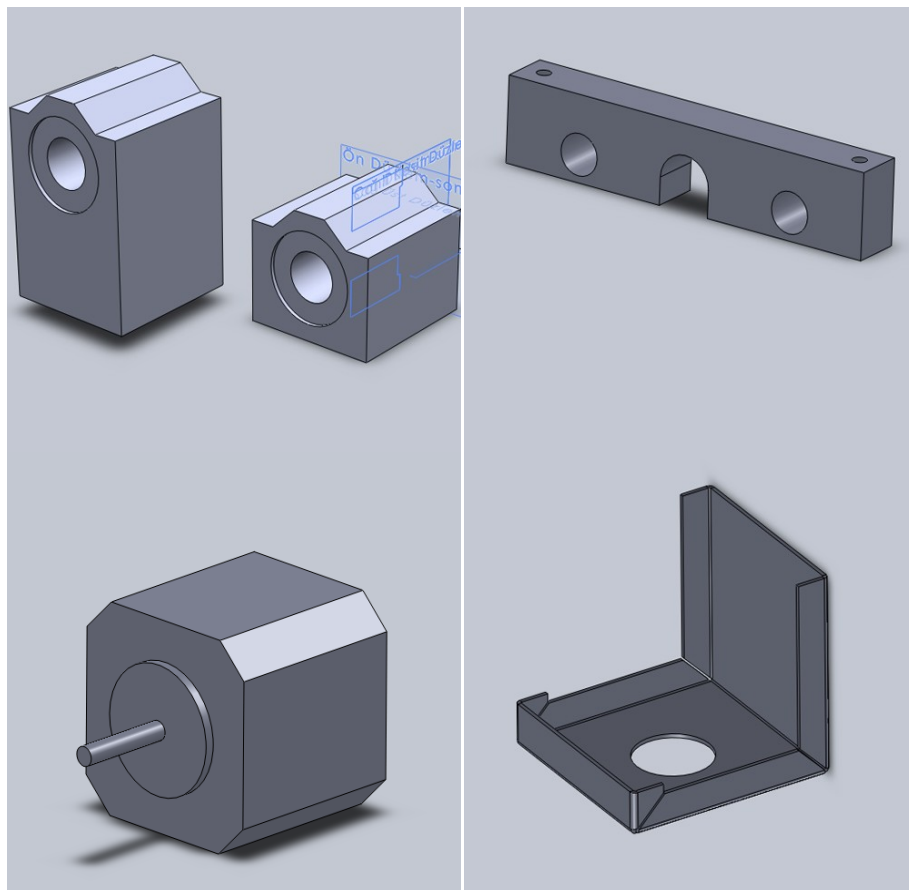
Some of the components of router drive-train. Two types of housing nuts (up-left), shaft housing (up-right), model of used stepper motor (down-left) and its covering part (down-right).
